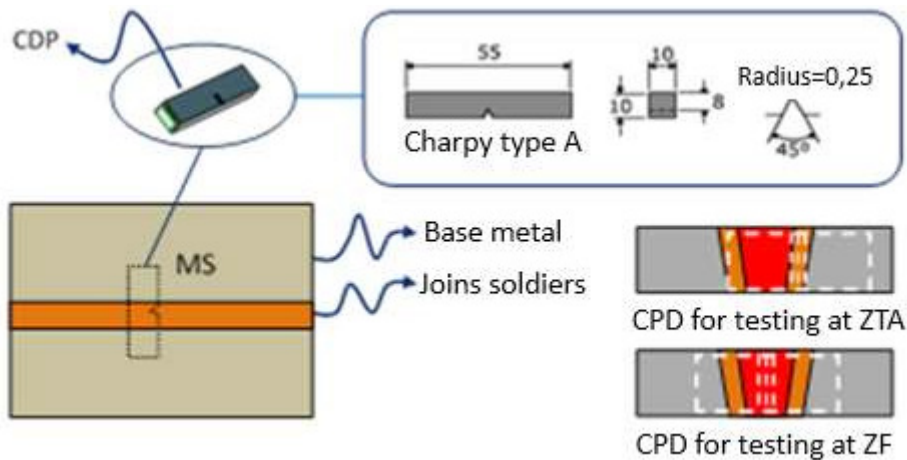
Representation of the specimen for the Charpy type A impact test with their respective dimensions taken from the welded material in the laser process and from the joins soldiers.
